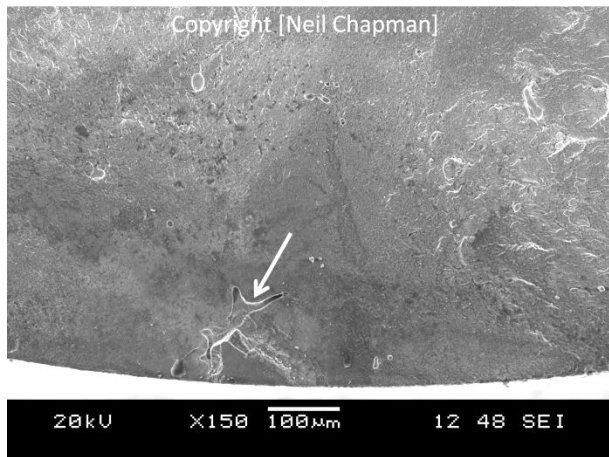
SEM image showing an example of an internal origin of the initial flat perpendicular corrosion fatigue crack (produced using the 10-1-1-1 s waveform and non-precorroded test specimen)
